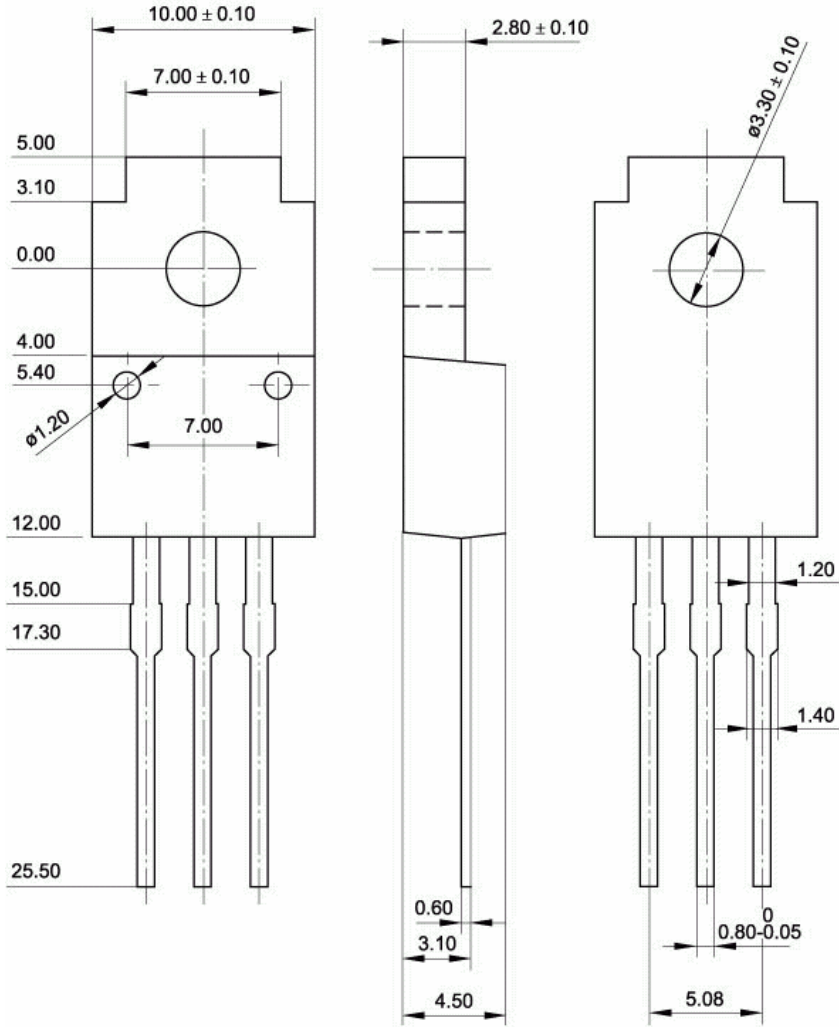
Outline dimensions (unindicated tolerance:  $\pm 0.15$  mm)
